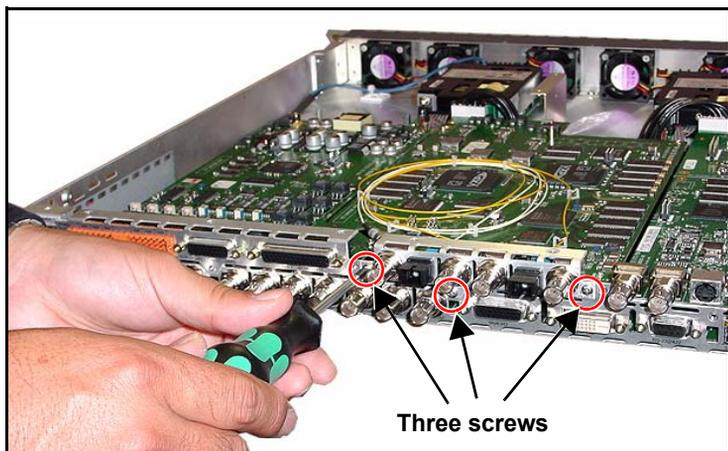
Removing HDTV Back Module Screws (X75OPT-HDUPG HD Module Shown)
